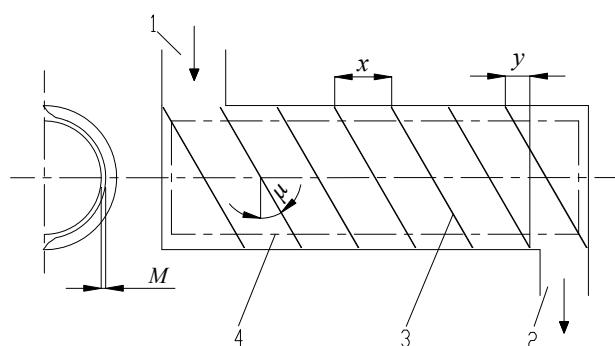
Structural diagram of guide plate: 1. Feed inlet; 2. Discharging port; 3. Guide plate; 4. Axial cylinder. Note: x is the spacing between two adjacent guide plates, mm; y is the front and rear overlap of the guide plate, mm; μ is the spiral rise angle of the guide plate, ($^{\circ}$); M is the clearance between the guide plate and the spike teeth of the axial cylinder, mm.
